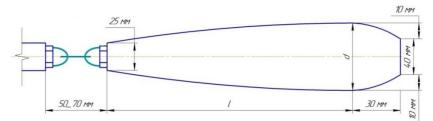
Scheme of the expander for the mole maker No. 2 of a cone-parabolic shape.
